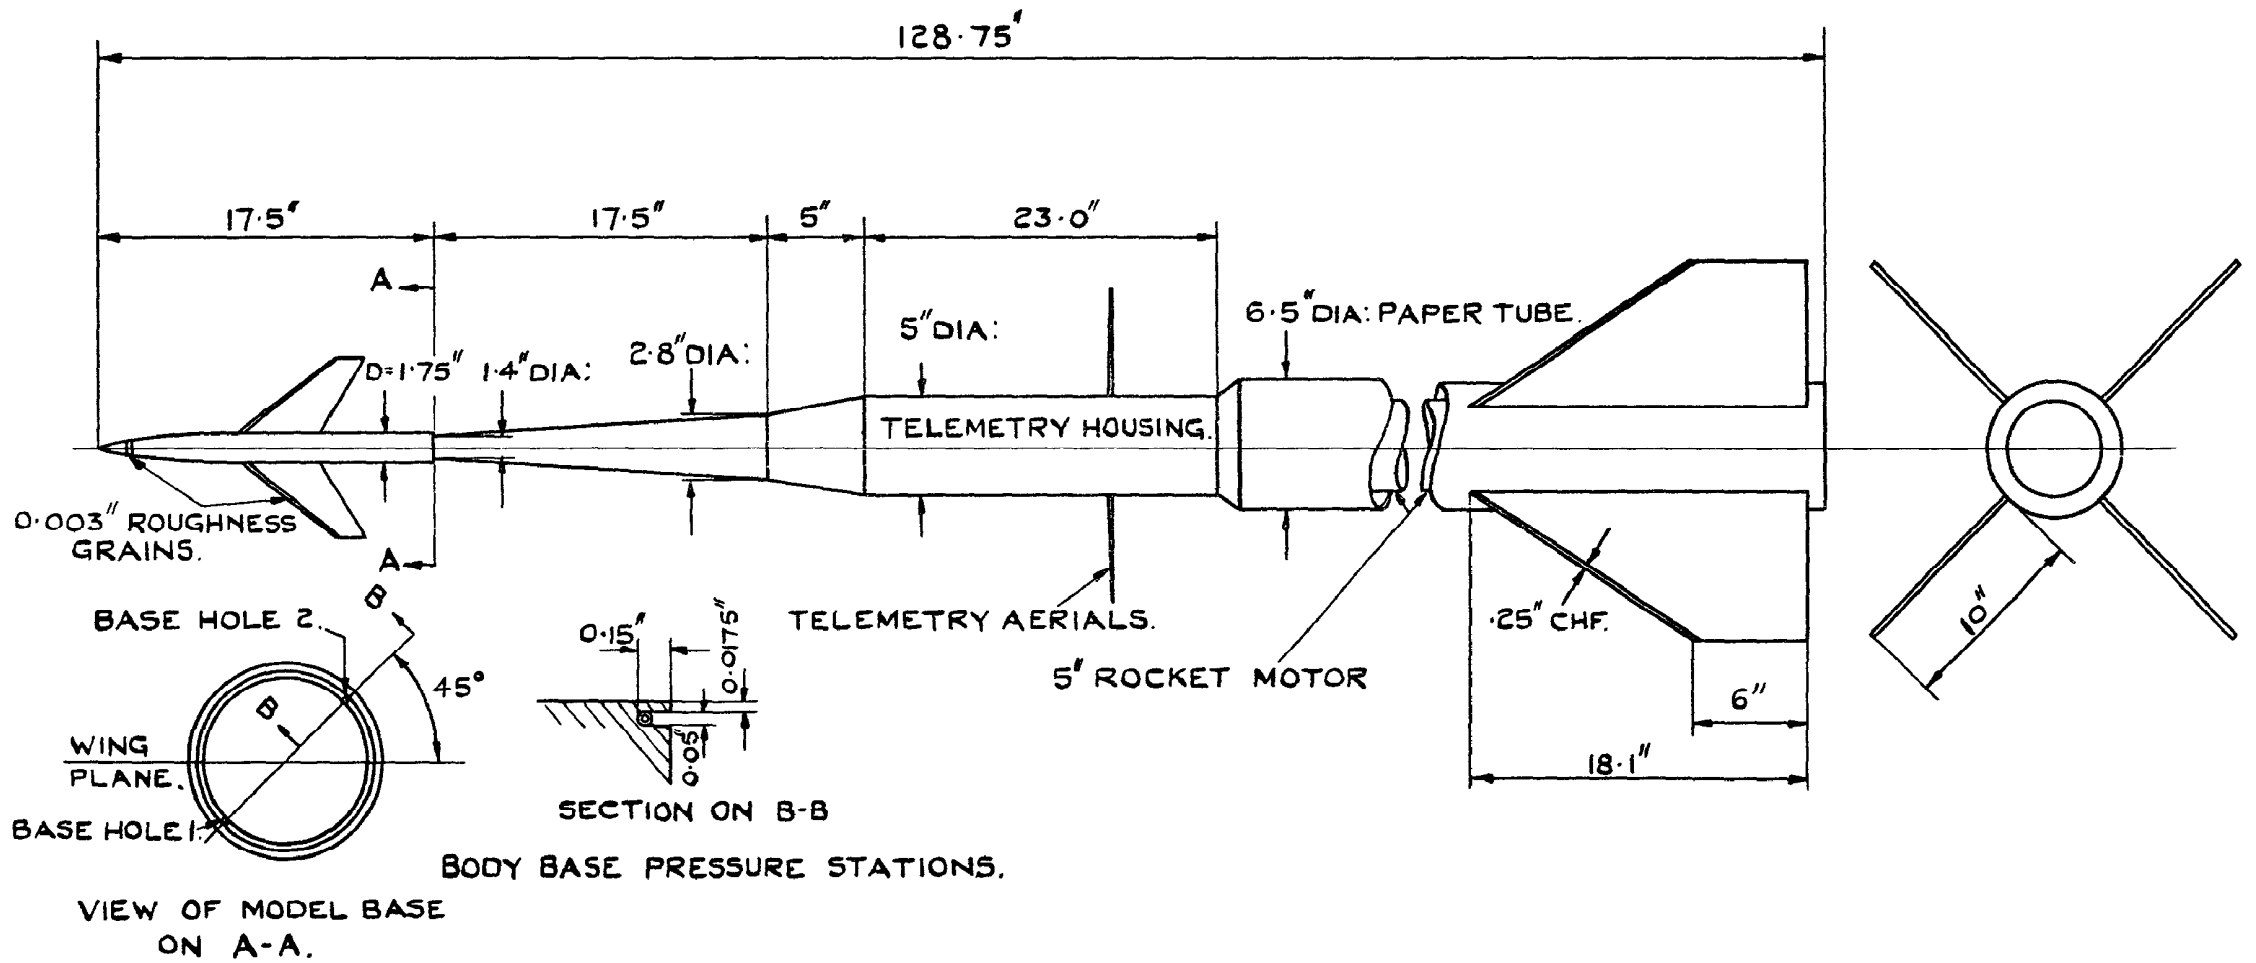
DETAILS OF NON-SEPARATING MODEL (5)
